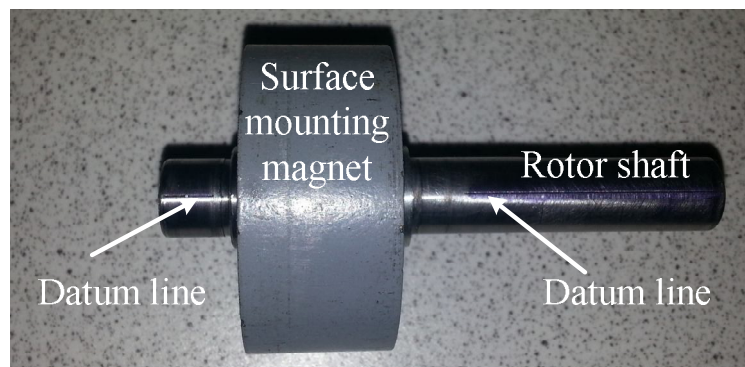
Prototype of rotor structure with datum line on rotor shaft
